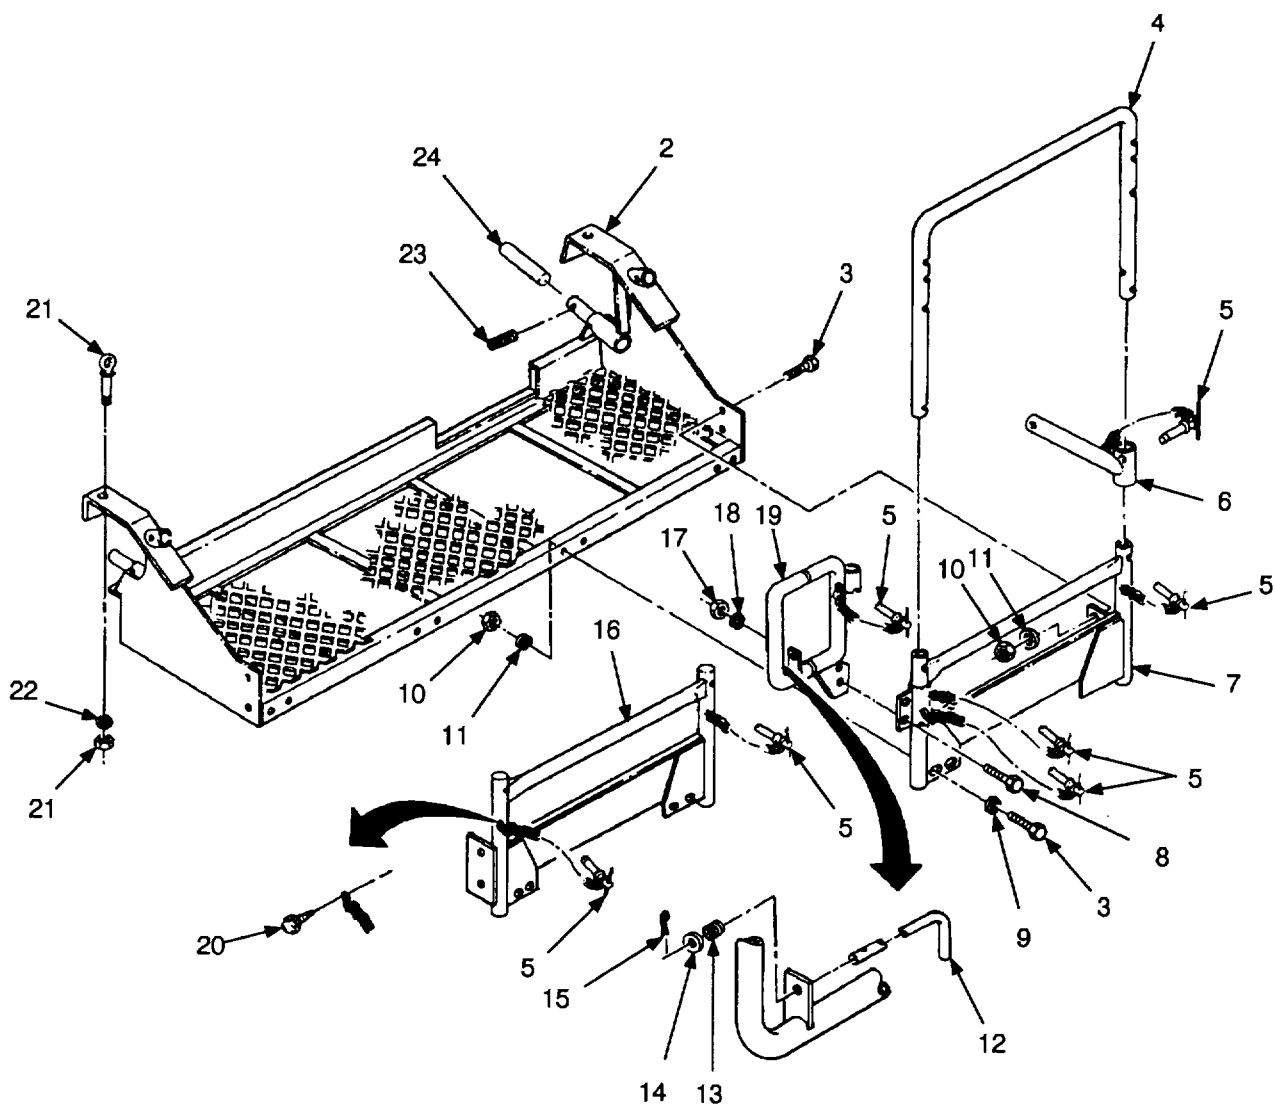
OPERATOR PLATFORM ASSEMBLY AND COMPONENTS.
